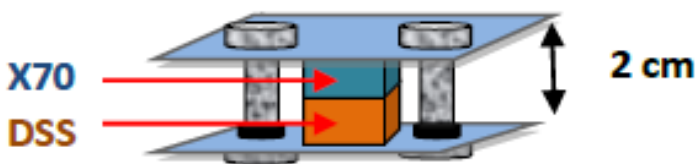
Schematic configuration of diffusion welding of dissimilar steels.
